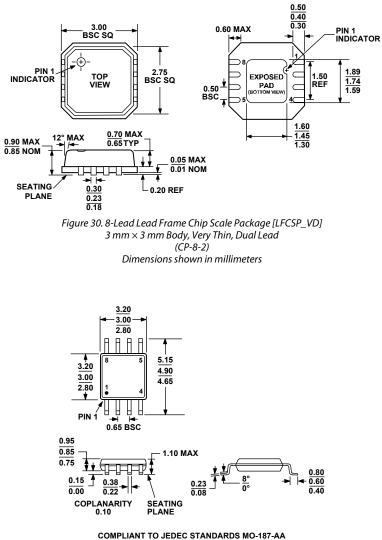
8-Lead Mini Small Outline Package [MSOP] (RM-8) Dimensions shown in millimeters
